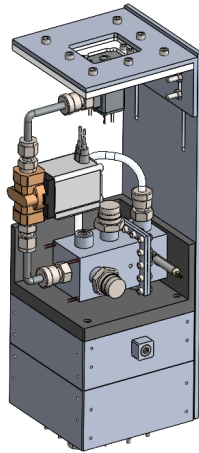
3D CAD Drawing: Resistojet Assembly.
